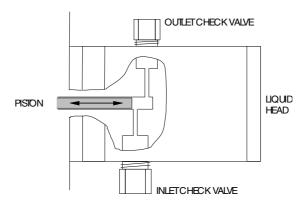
Cutaway View of Liquid Head (50 mL/min head shown)
